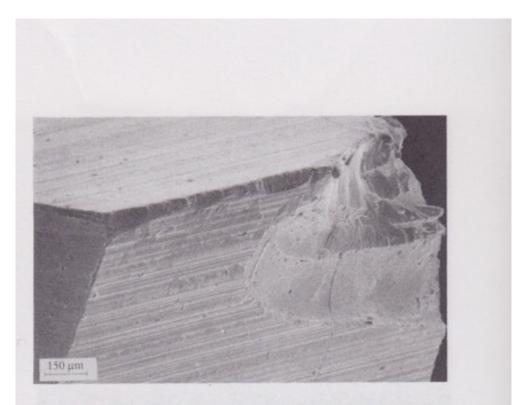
Scanning electron micrograph showing brittle fracture of a cemented carbide tool tip used to cut aluminum
